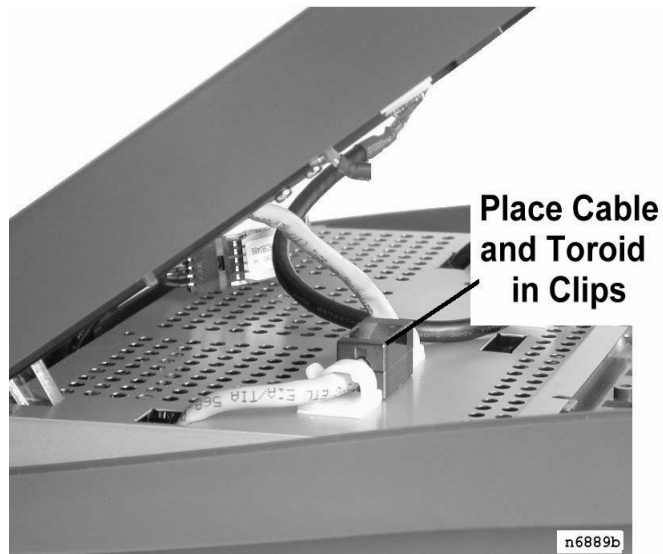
Securing the Mag Card Reader Cable to the RF Shield
